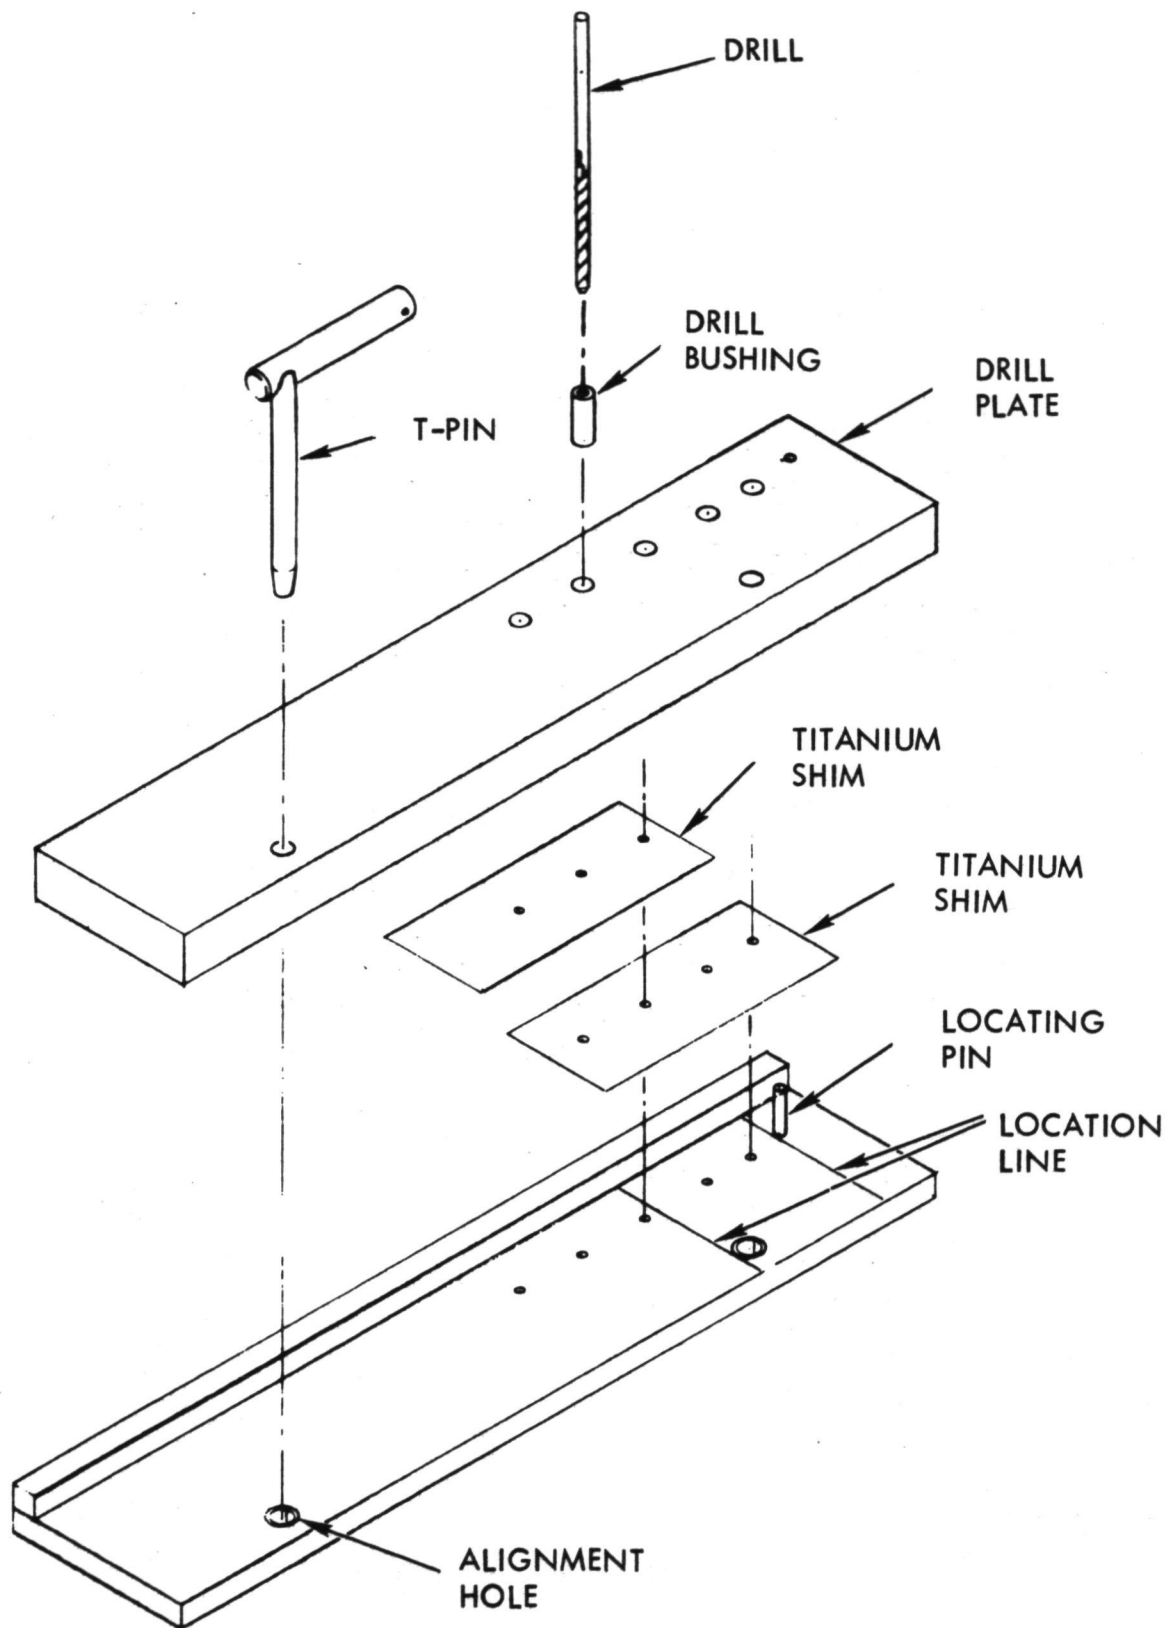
TYPICAL DRILL TOOL FOR DRILLING HOLES IN TITANIUM SHIMS
